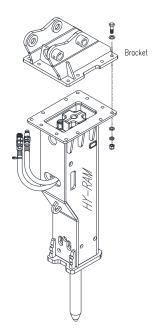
Housing Box, Mounting Bracket & Bolt Set
